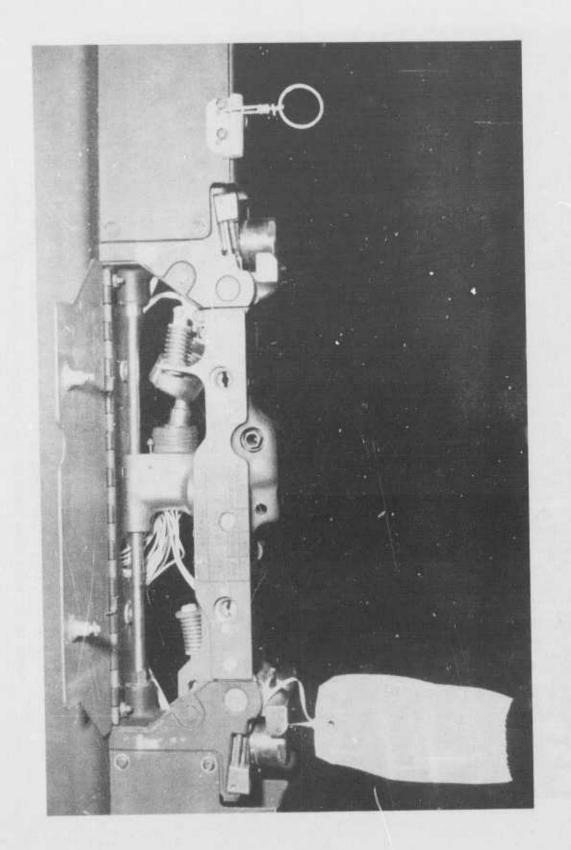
BRU-3A/A rack with the positive tail fin opening device installs over the tail solenoid (a swivel and link assembly is inserted in the device)
